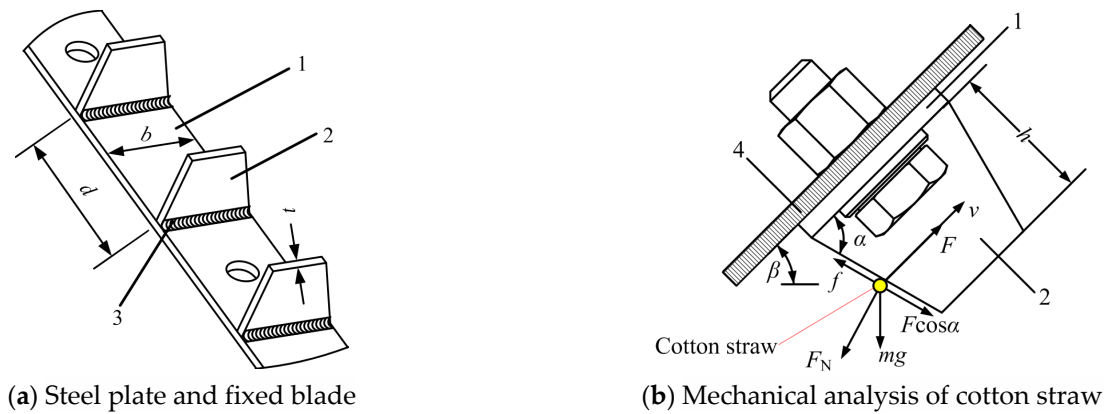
Design of the fixed blade for crushing: 1. Steel plate; 2. Fixed blade; 3. Positive fillet weld; 4. Upper inner wall of the crushing chamber. b is the width of the steel plate, d represents the two adjacent fixed blades, t represents the fixed blade, α is the dip angle, h is the height of the fixed blade, F is the inertial force, F_N is the normal cutting force of the cotton straw, f is the friction force, v is the velocity of the cotton straw before the collision, β is the throwing angle of the crushing chamber, and m is the mass of the cotton straw.
